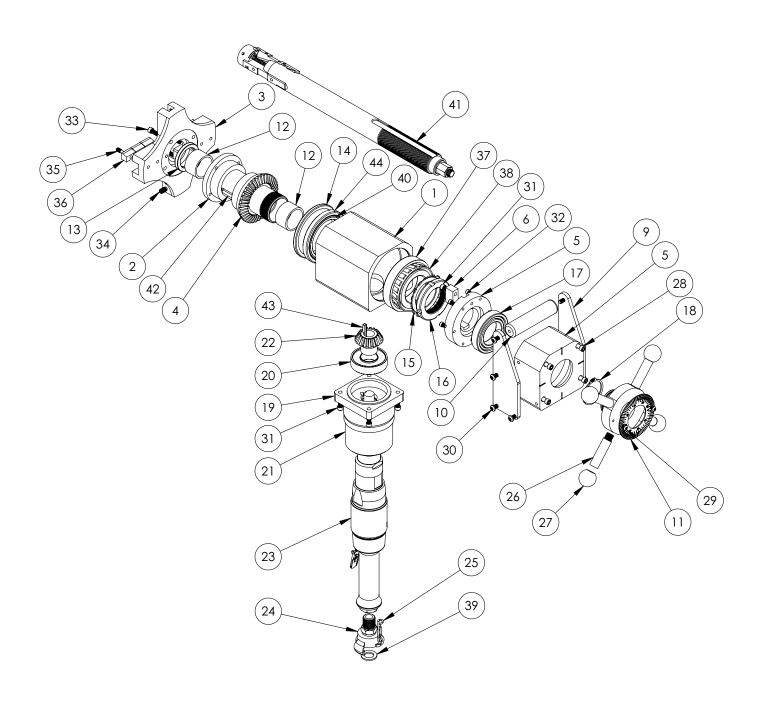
PB6 POWER BEVELER, PNEUMATIC ASSEMBLY (P/N PB06PN)
